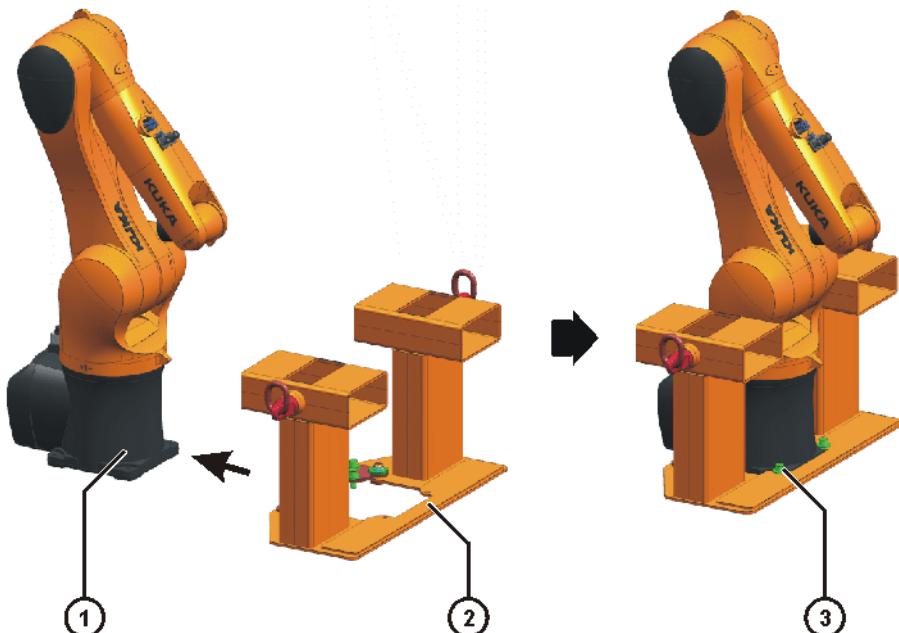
Pushing on the Load Lifting Attachment and fastening it at the front
